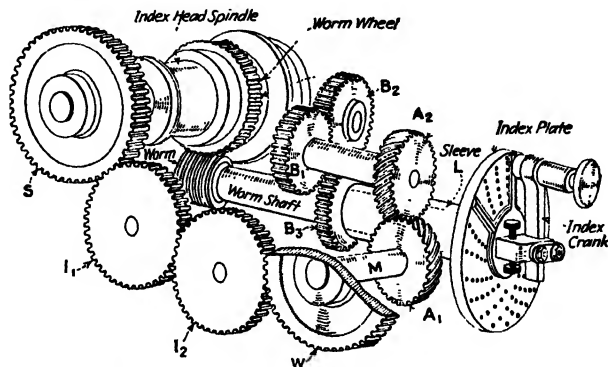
This figure illustrates the gearing for differential indexing with a Brown & Sharpe index head (extended for clearness). In practice, one idler, or two idlers, or a compound of any two of the change gears with or without an idler, may be used between the gears *S* and *W*.
